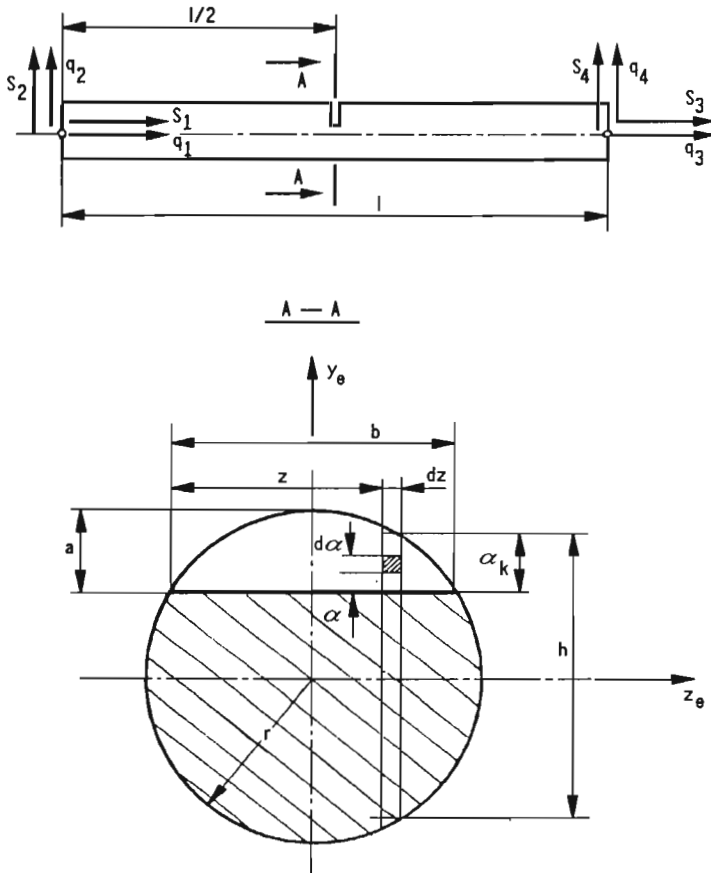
(a) bar finite element with crack, (b) cross-section of the element at the crack area
